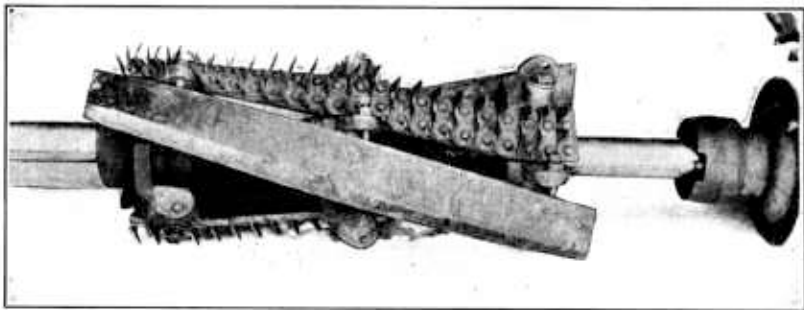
A cutter head equipped with four full blades. This head may be operated using two blades, one on each side of the head, or using one blade with counter-balances on the opposite side of the head
